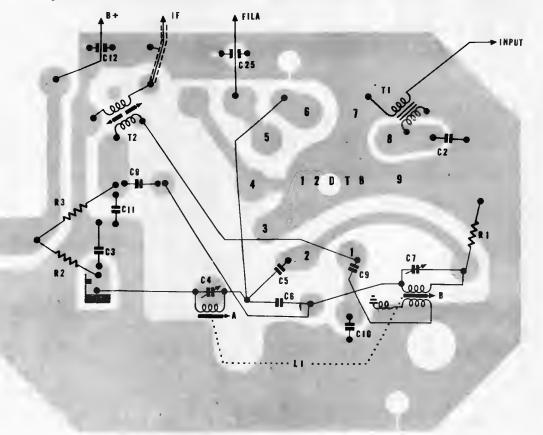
Bottom view of printed circuit chassis with components shown symbolically
